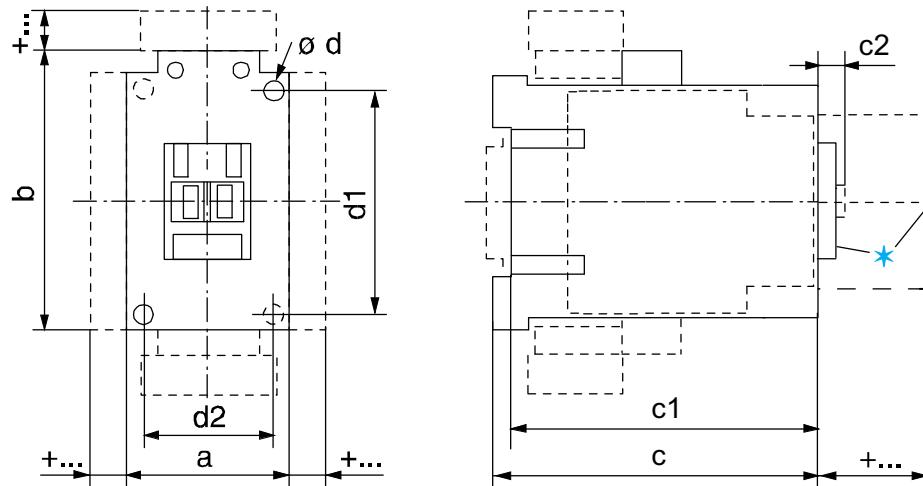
Mounting Position — 100-C Contactors; 100S-C AC Contactors and DC contactors with electronic coils
